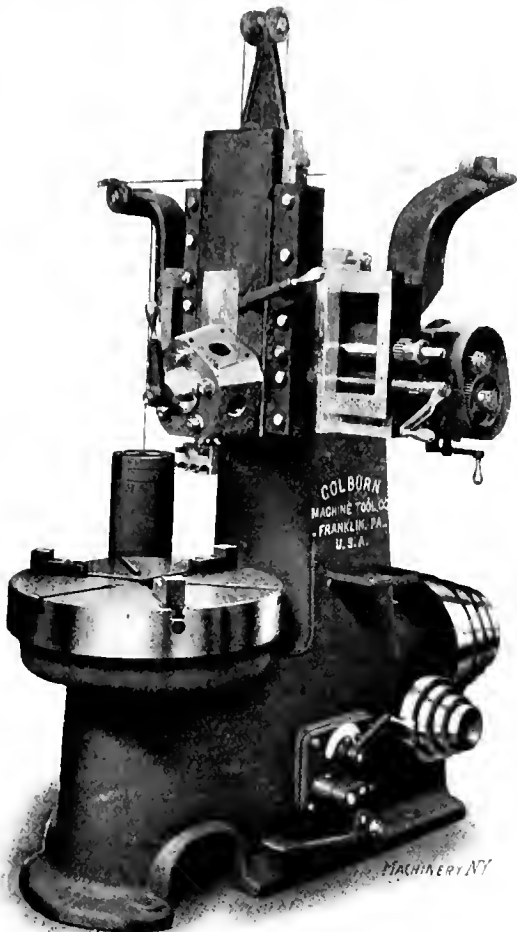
Thirty-inch Vertical Boring Mill, built by the Colburn Machine Tool Co.
